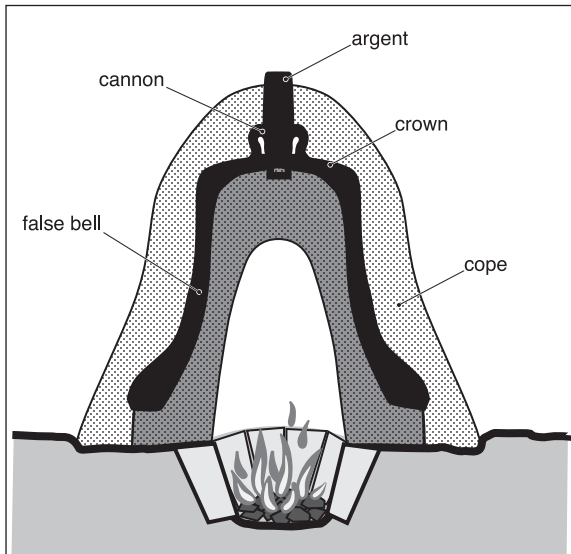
Section of bell pit showing the moulds with the cavity ready for casting over the bell-pit.
